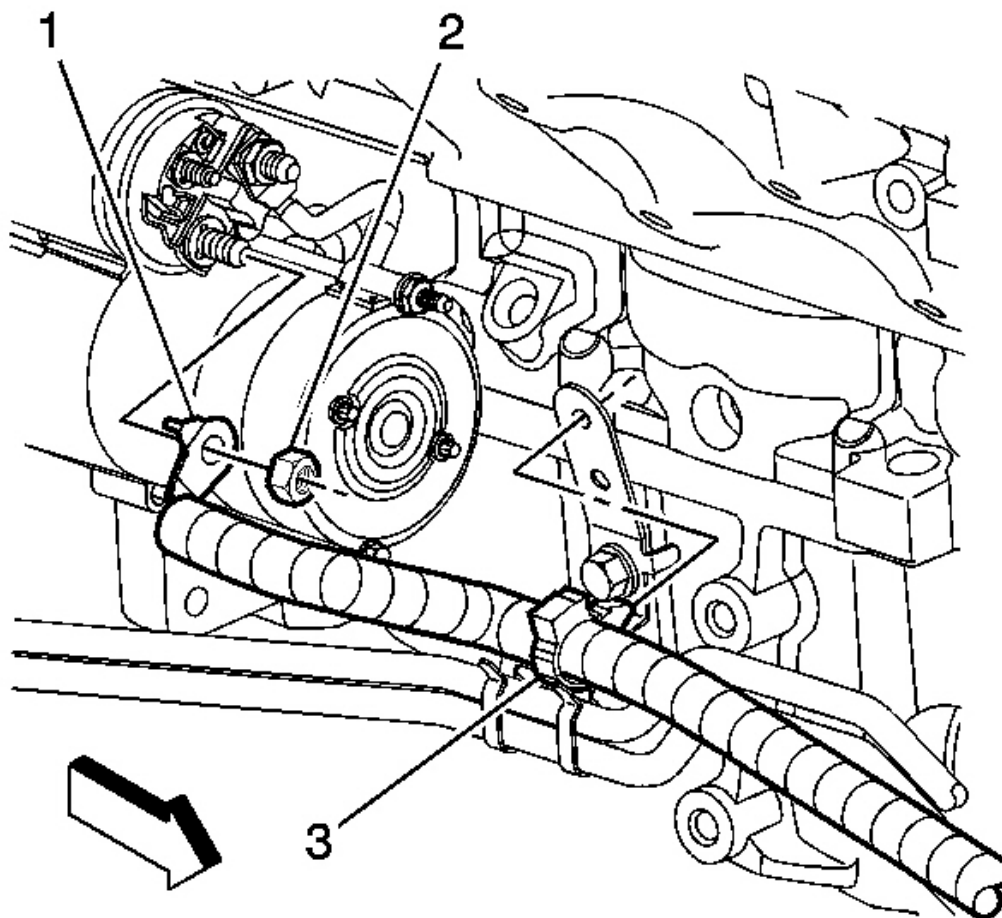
View Of Positive Cable Lead, Nut & Cable Clip
